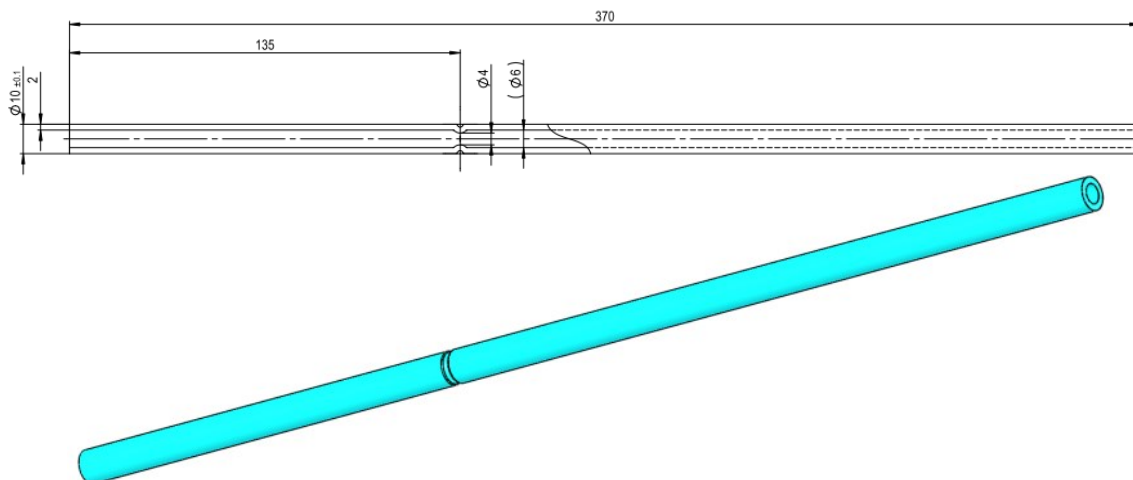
Technical drawing of Grimsel 2 quartz reactor.
